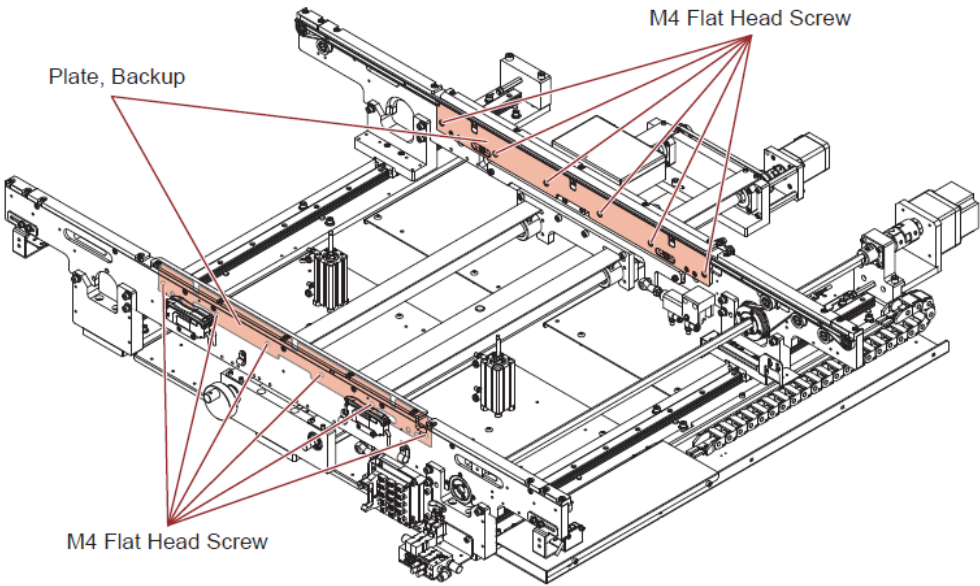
Replacement of Conveyor Belt 1 (BF-3Di-L1)
